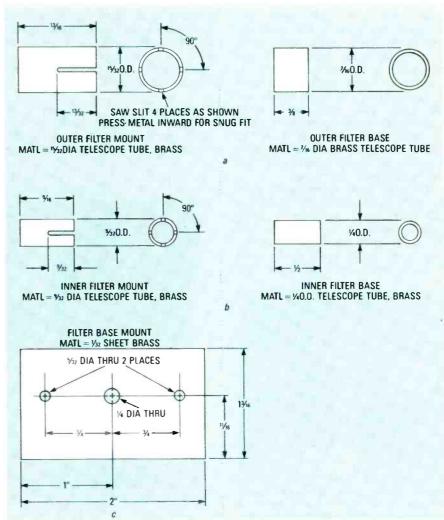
All PARTS OF THE OPTICAL ATTENUATOR are made from brass sheet or tubing. Both the inner and outer filter bases are soldered to the brass mounting plate.
